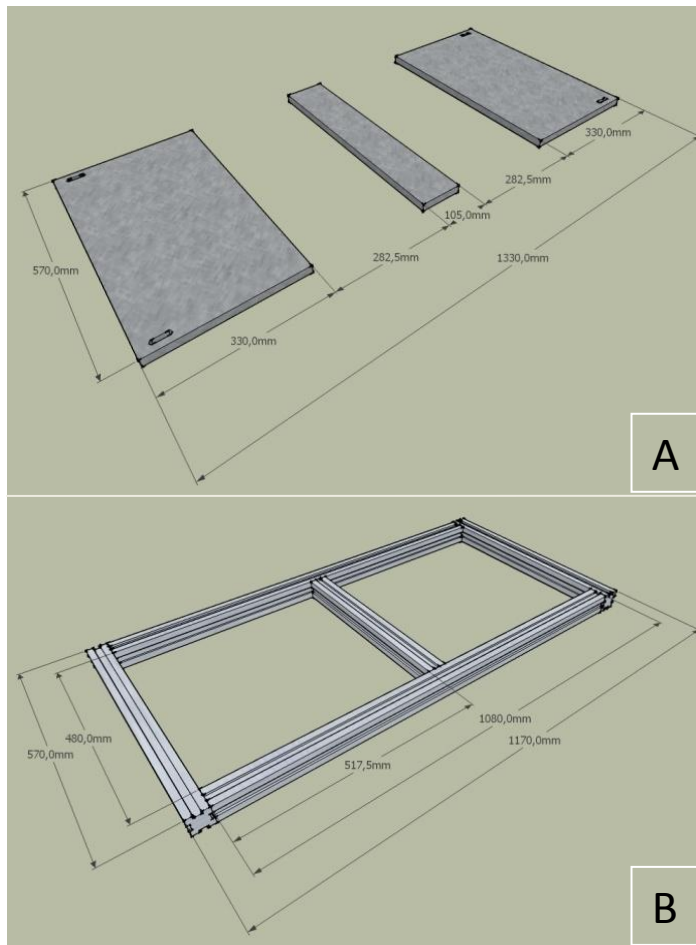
Dimensions of (A) the intersected base plate and (B) the bottom frame
